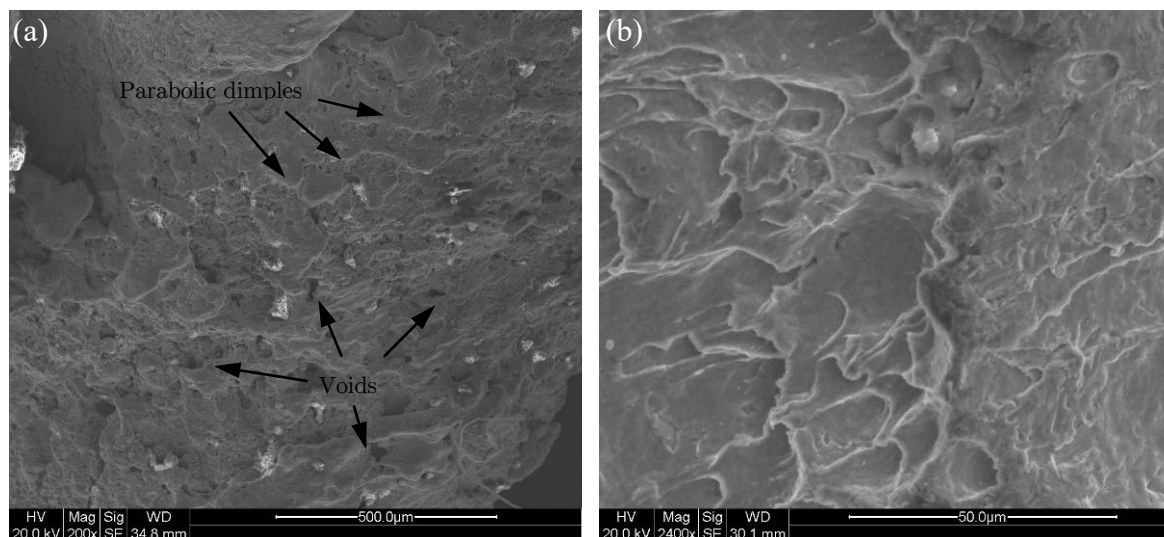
Morphology features of fracture surfaces of EFP fins. (a)Fracture surfaces, (b)Parabolic dimples.
